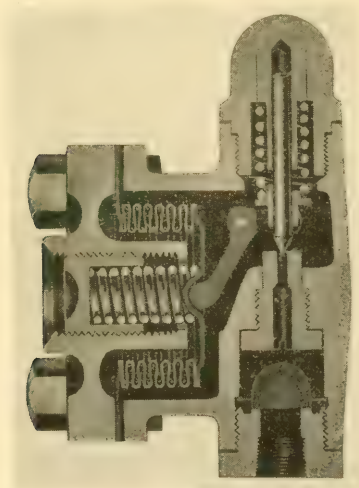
SECTIONAL VIEW OF AMERICAN AUTOMATIC EXPANSION VALVE.
